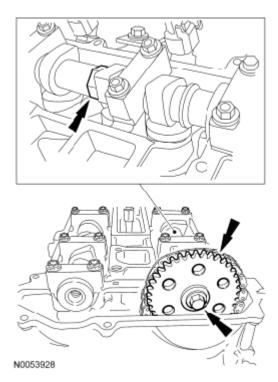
Locating Intake Camshaft Drive Gear Courtesy of FORD MOTOR CO.
